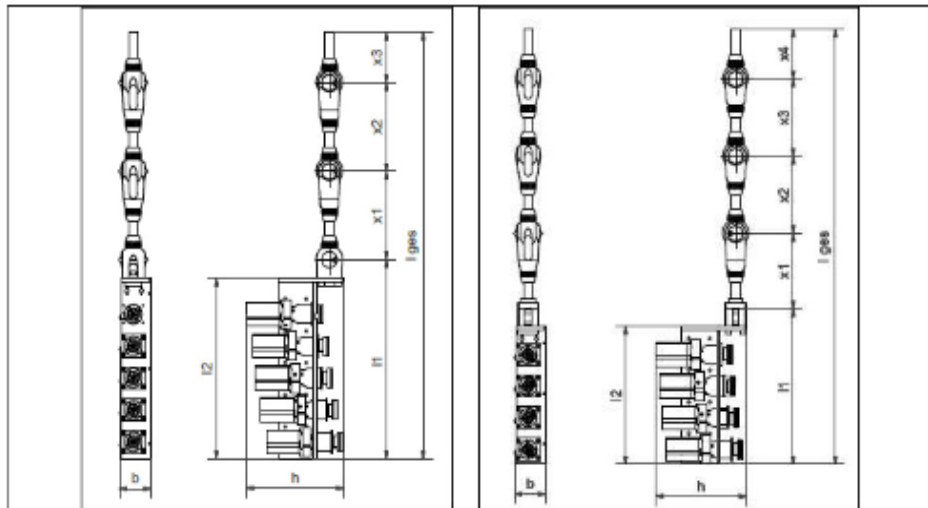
Complete system drawings 1) with rotating joint, 2) with WSU8-001
